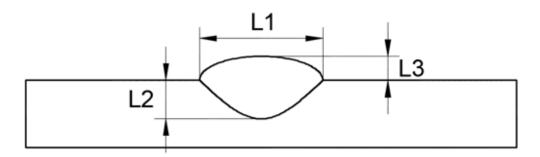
Dimensions for weld deposit macrographs.
